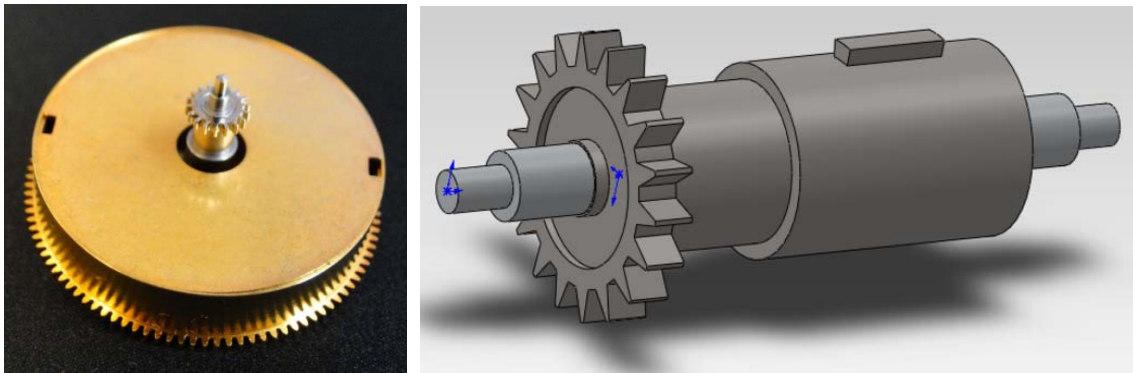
Great wheel, W_{11} , with attached barrel and inserted winding stem - (a) actual component, (b) SolidWorks image of winding stem
